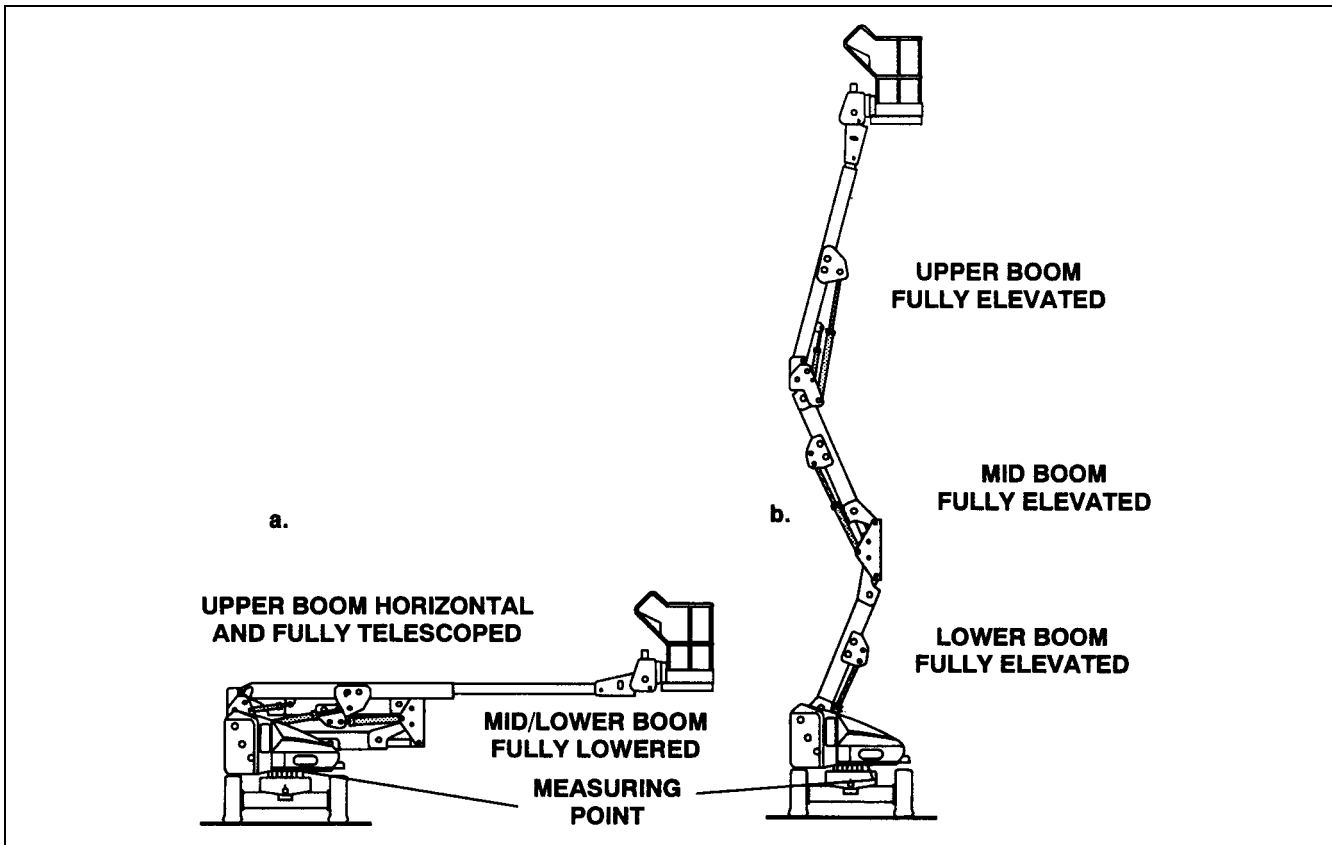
Swing Bearing Tolerance Boom Placement - 40/n40/45 electric. (Sheet 2 of 2)
